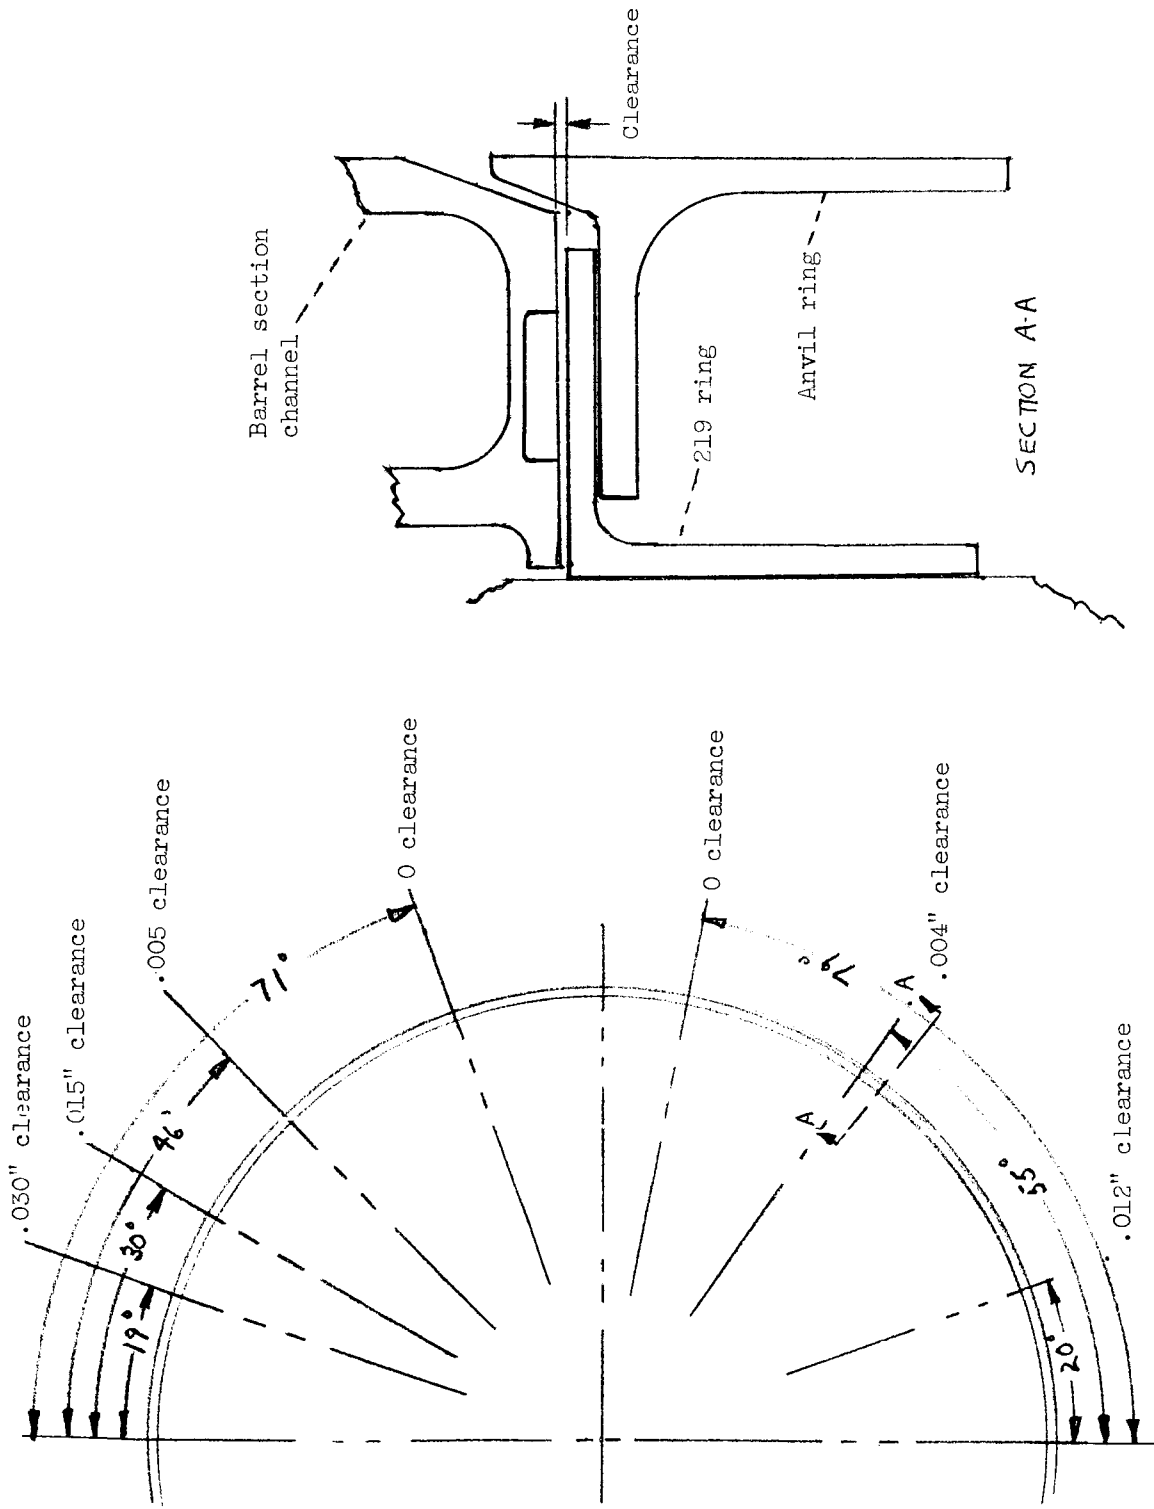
Clearance between barrel section channel and 219 ring during Test 9.
